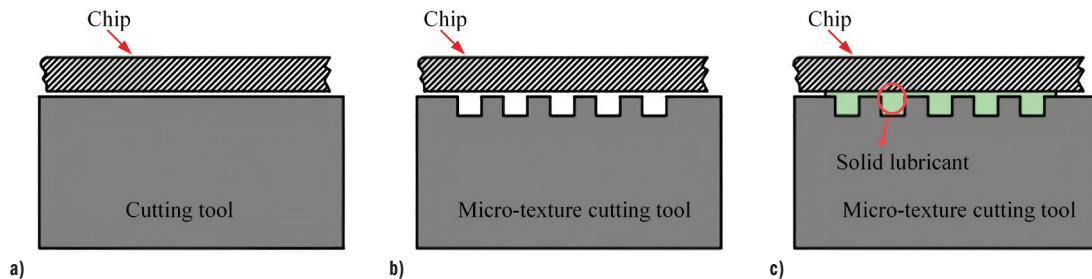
Mechanism of action of self-lubricating cutting tools, a) traditional tool; b) microtextured tool, and c) self-lubricating tool
